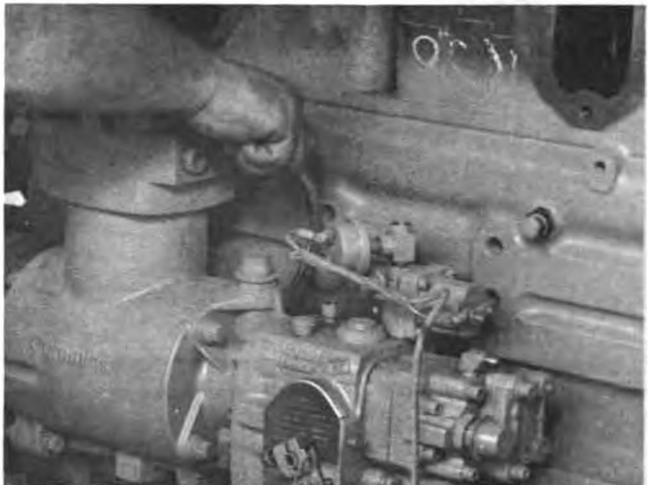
Remove The Capscrews That Hold The Fuel Pump.
